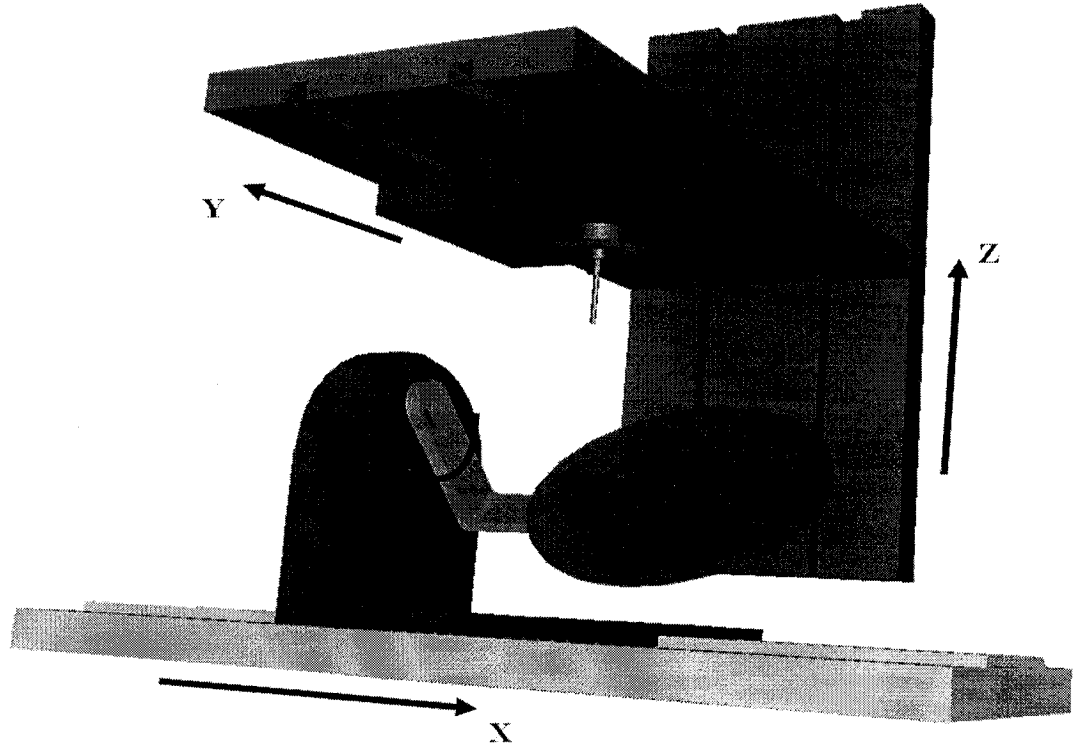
Schematic drawing for 5-axis milling machine (*TRR-TT*).
